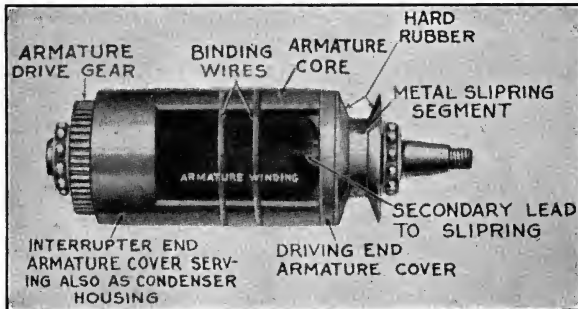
View of armature of Bosch DU4 high-tension magnetos showing ball bearings on armature shaft, and pinion that drives distributor gear.
